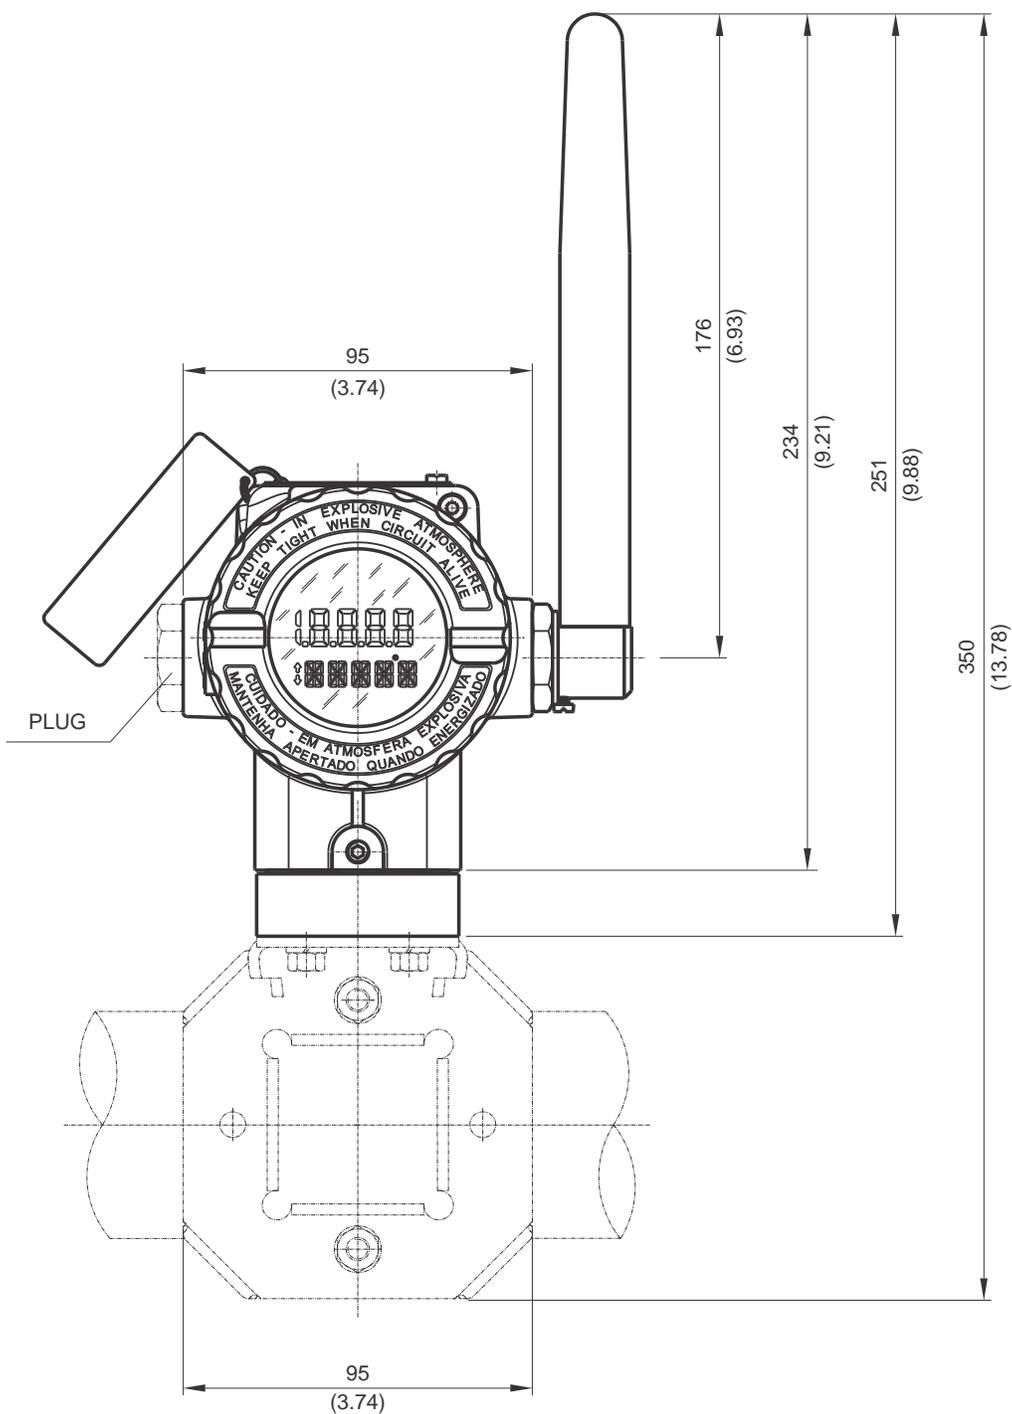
Dimensional Drawing of RP400 WirelessHART® mounting in vertical
